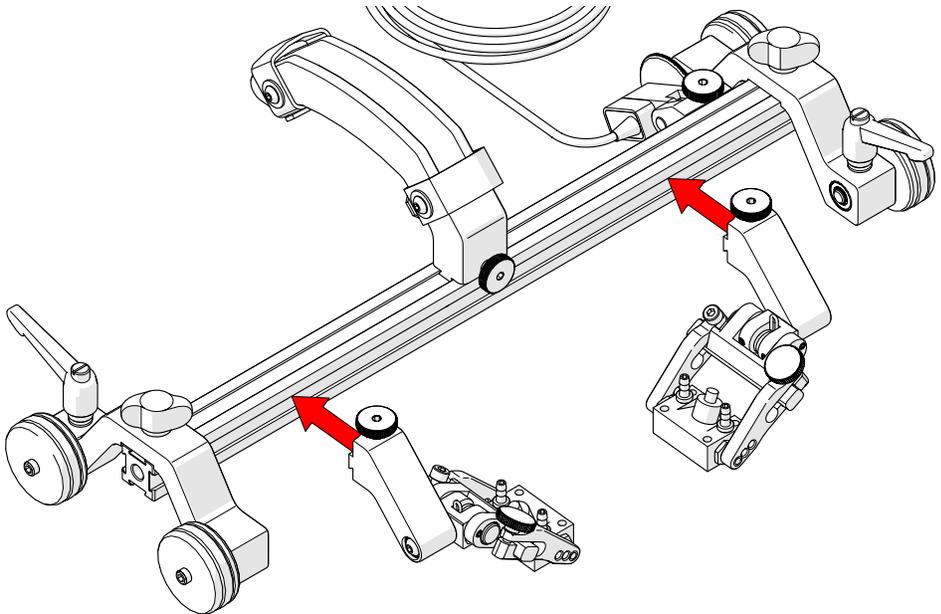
Attach spring-loaded probe holders to appropriate configuration
